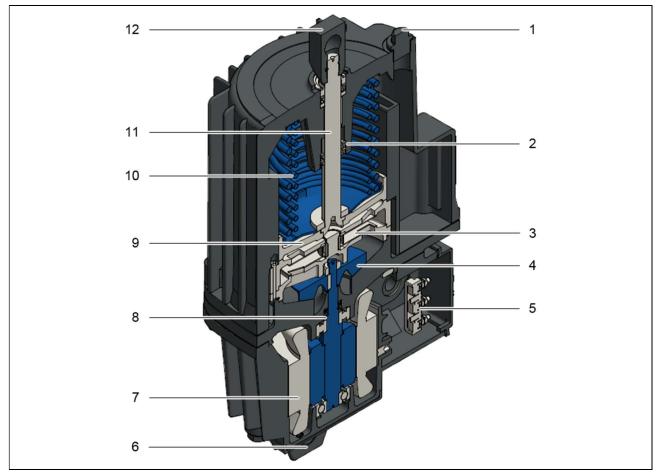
ELDRO[®] thruster layout (example: Ed 50 – Ed 80 C-HS)
